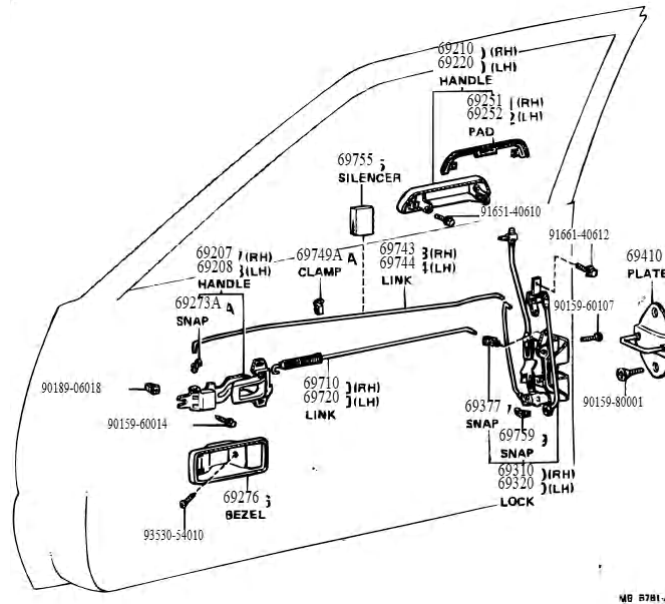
Typical Mechanically Complex Door Latch and Lock Example
